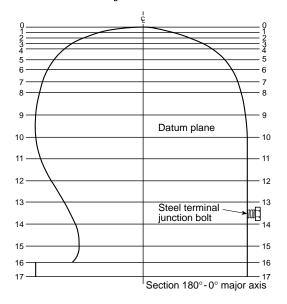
(c) ISEA size 7 headform, front.
